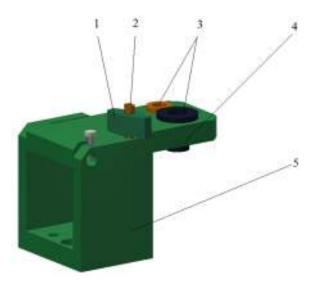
Subassembly for guiding helical drill: 1 – butterfly nut; 2 – threaded rod; 3 – guiding bush; 4 – guiding plate; 5 – support.
